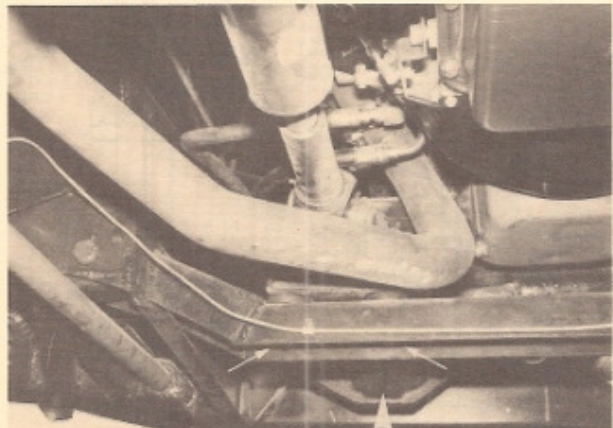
INNER YOKE REMOVAL – Remove 1 11/16" retaining nut that secures the inner yoke. Remove the inner yoke by using a claw puller.
